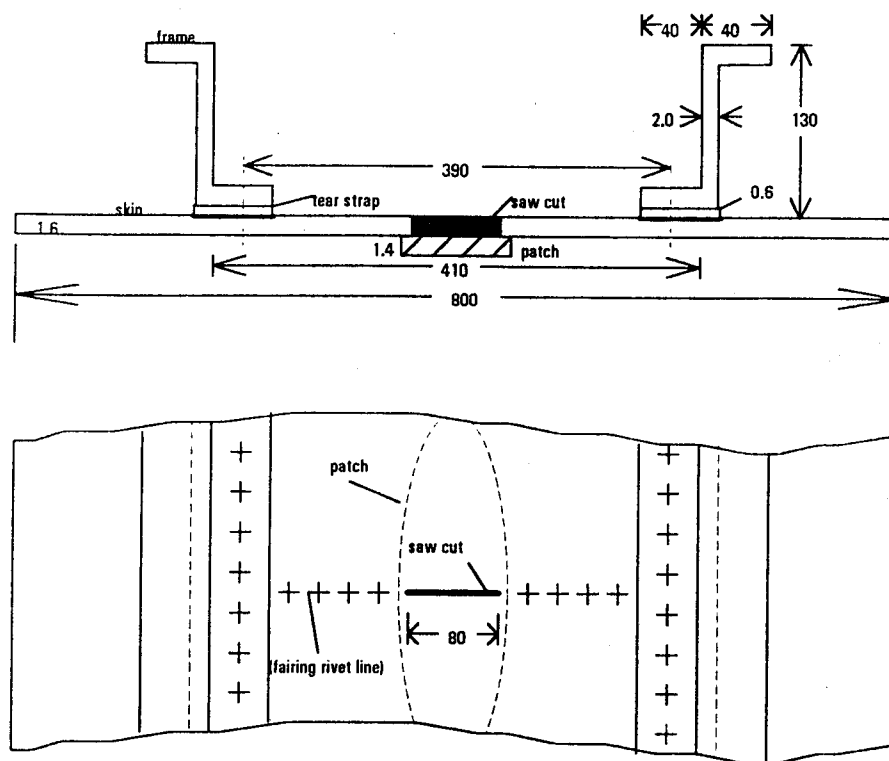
Sketch of large 7075-T6 stiffened test panel. (All dimensions mm).
